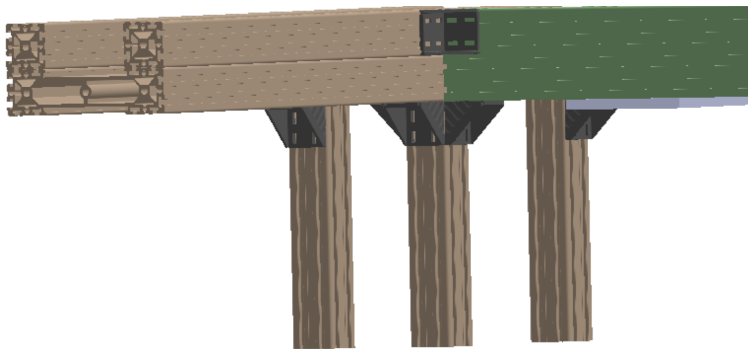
Brackets for connection between parts 1, 2 and 3 on the bottom side
